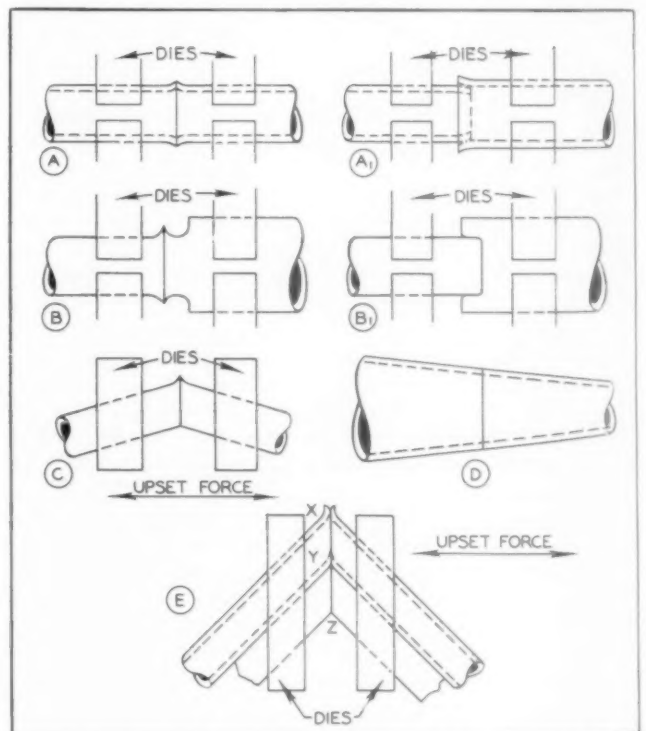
Several common joints encountered in flash welding are shown above, together with solutions to the problem of unequal OD of stock.
